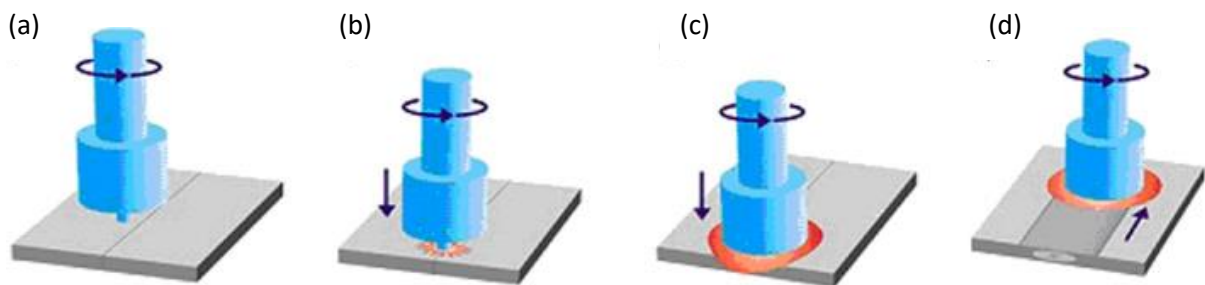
Friction Stir Welding stages: (a) initial, (b) plunging, (c) dwelling, (d) welding. (Guerdoux et al., 2009).
